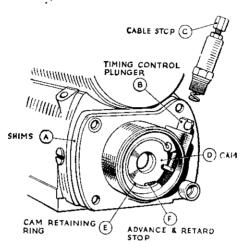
Contact breaker housing, showing timing control mechanism
